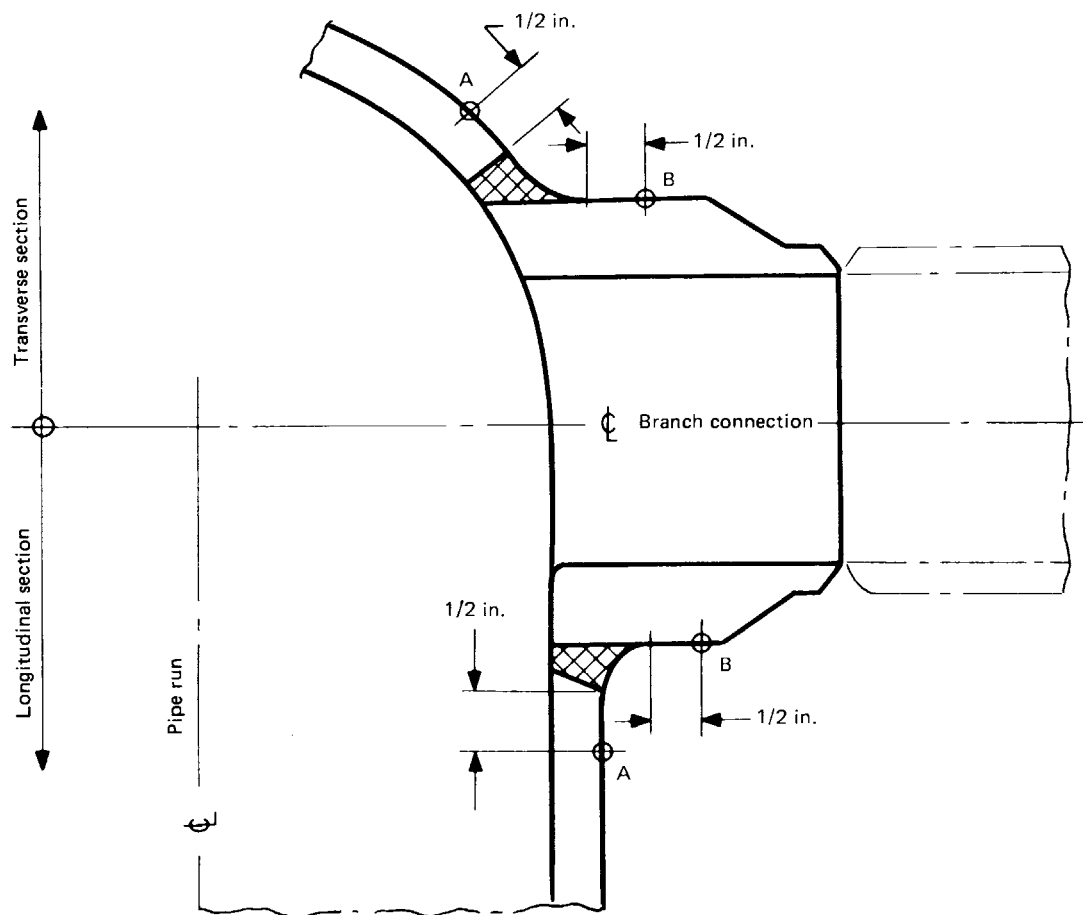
PIPE BRANCH CONNECTION
